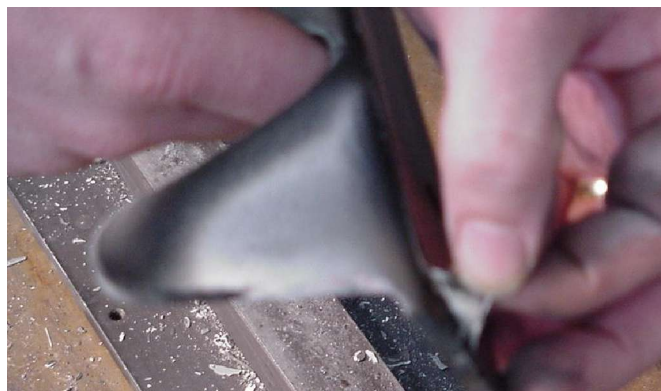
3 Photograph of the operator showing the graphite on the rear of the shield.
